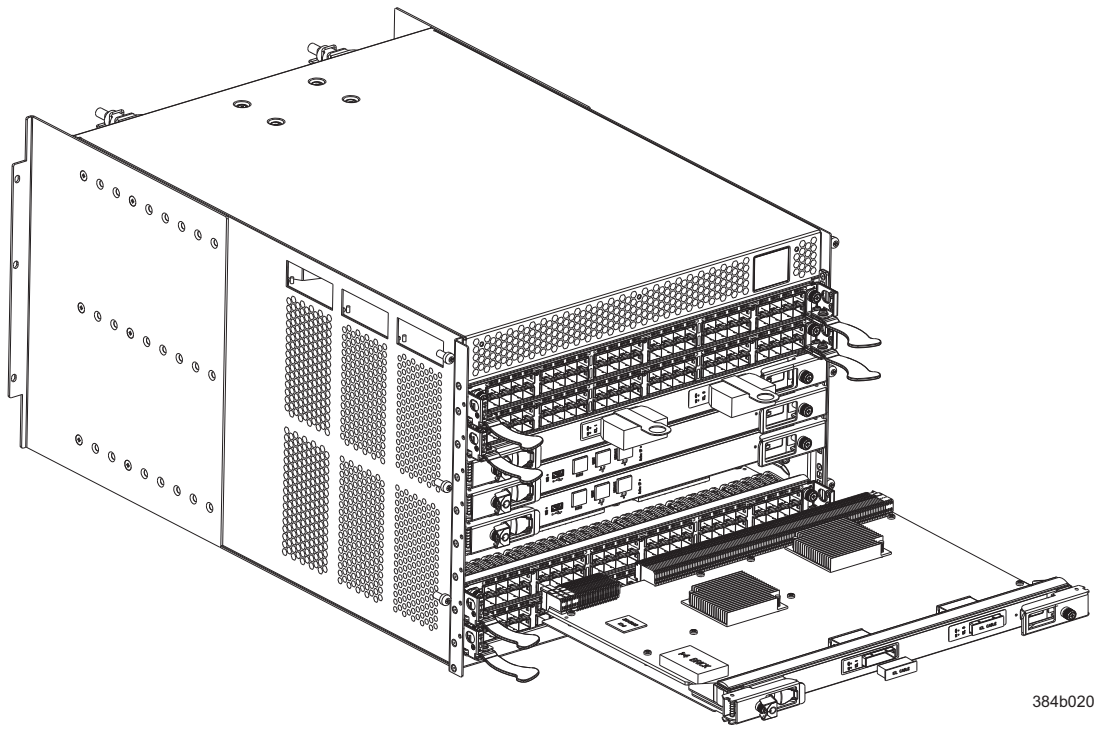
Removal of the Core Switch Blade (CR4S-8) from a 2499-192 chassis
